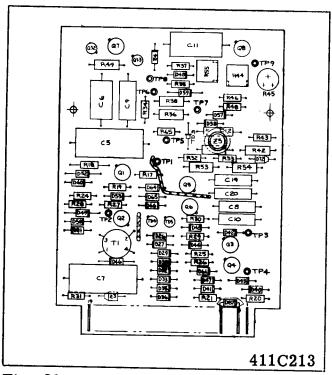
Printed Circuit Board Assembly for SDG Relay
